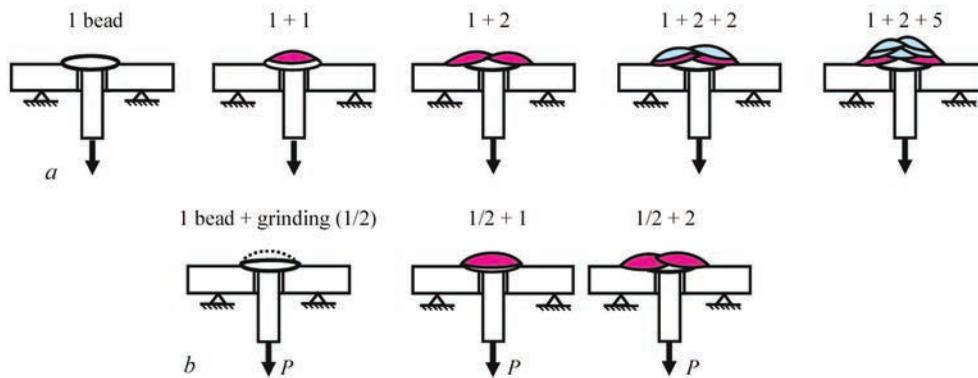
Technological schemes of welding of test joints: *a* — welding with simple beads; *b* — welding with first bead grinding
